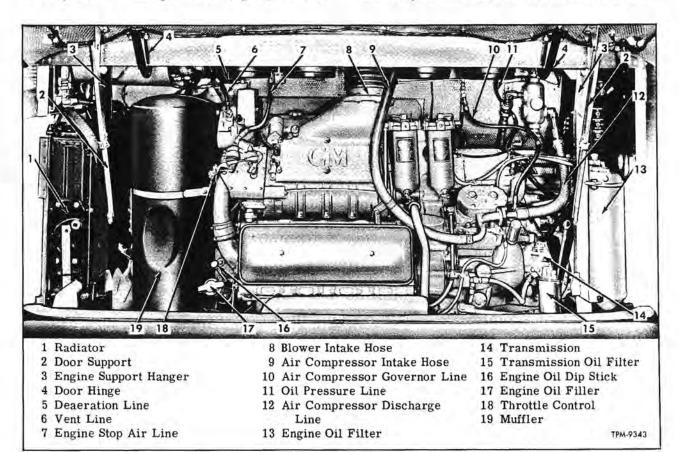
Power Plant Assembly Installed—8 Cylinder with Mechanical Transmission
